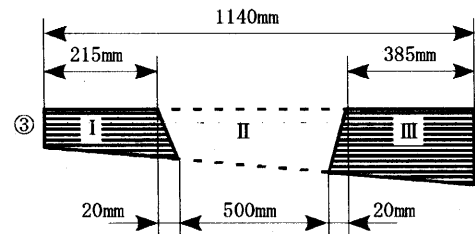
Shape of prepreg sheet for twin-kick shaft
